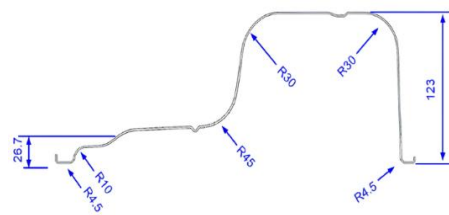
Cross-sectional view of a workpiece with overlapping curved corners.
